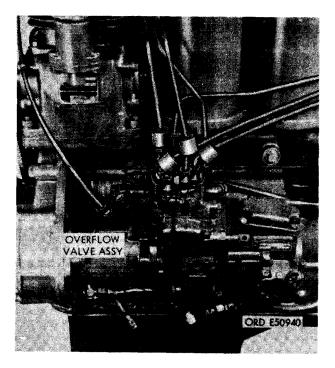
DISCONNECTING OR CON-NECTING FUEL HOSES FROM FUEL IN-JECTION PUMP (LATE MODEL ENGINES). (5) Figure 60. (A) Plug fuel injection tube openings in injection pump hydraulic head and tubes to prevent entry of dirt. (B) Disconnect swivel end of fuel supply pump-to-fuel filter inlet hose from 3/8 tube x 1/4 pipe, 45 degree elbow at bottom of fuel supply pump assembly. (C) Remove 1/4-inch plain nut, 1/4inch lock washer, and hose clamp attaching fuel hoses to stud in the fuel injection pump bracket assembly. (D) Disconnect fuel injection overflow and fuel return-to- fuel filter inlet hose from 3/8-inch tube tee in fuel filter assembly. Disconnect other end of hose from overflow valve assembly in fuel injection pump assembly. Plug all openings to prevent entrance of dirt.
